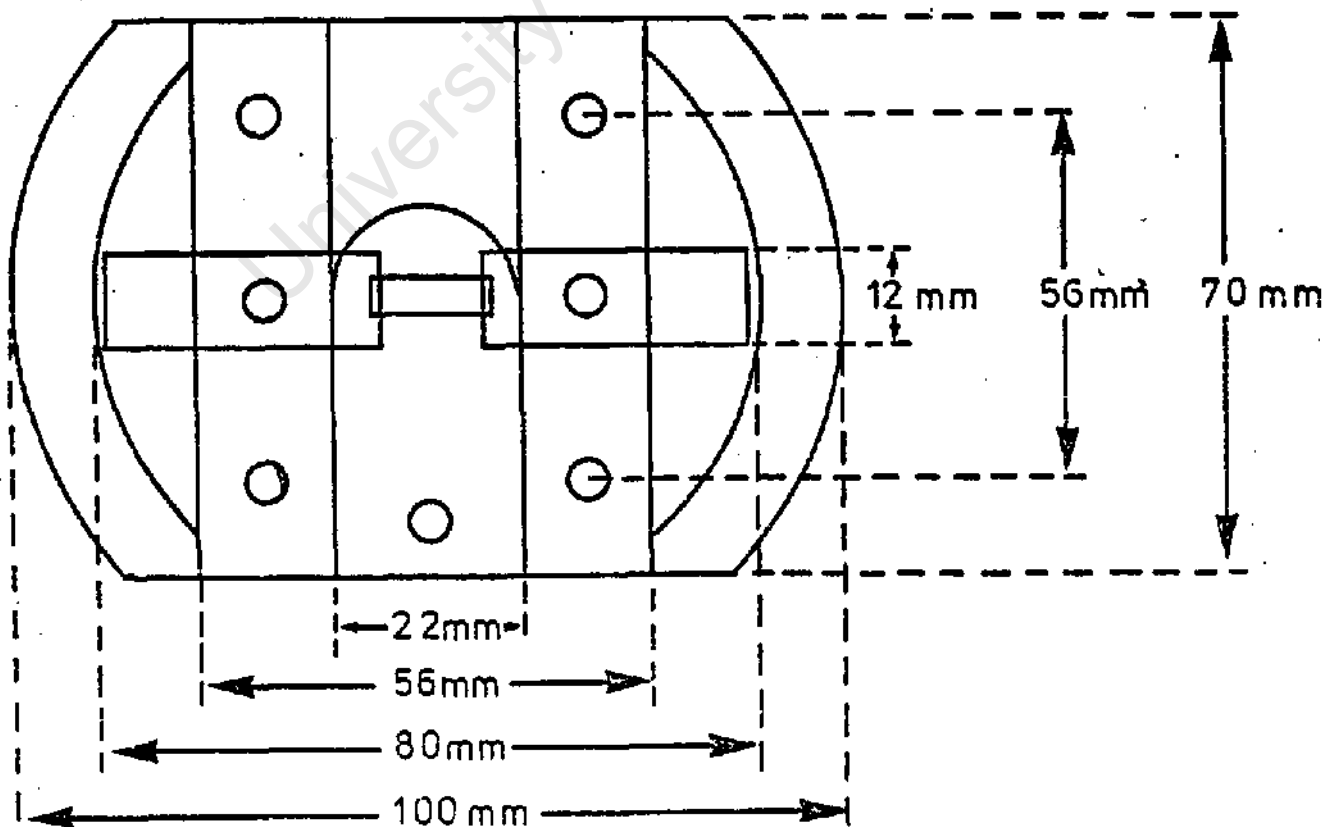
(b) The Specimen Holder Slide Assembly (Plan)
